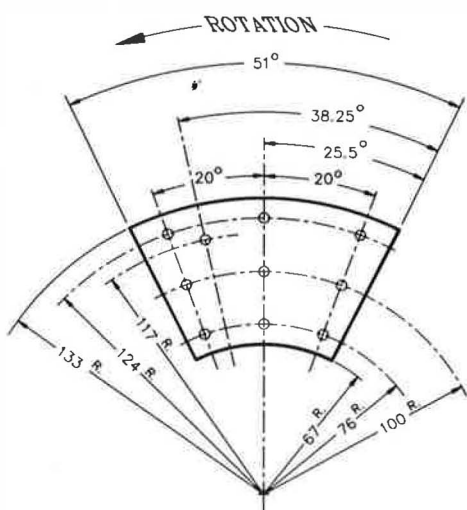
Location of thermocouples puddled in the shoe babbitt
